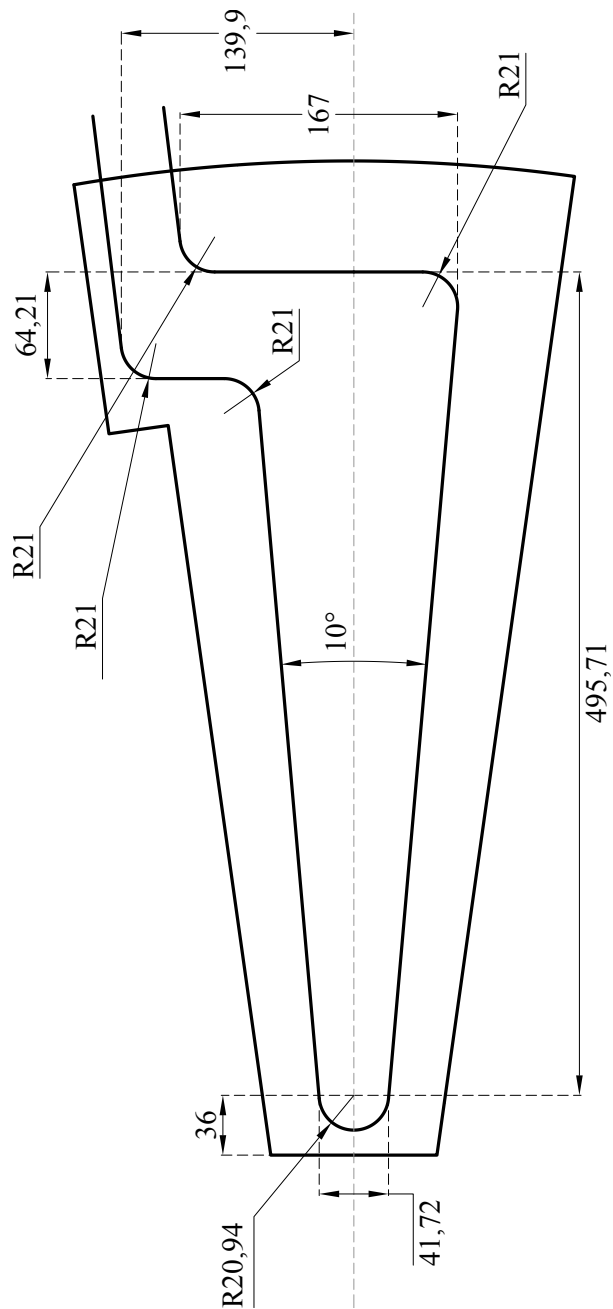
The LTF-petal design sketch containing tube dimensions and position relative to the facings.
